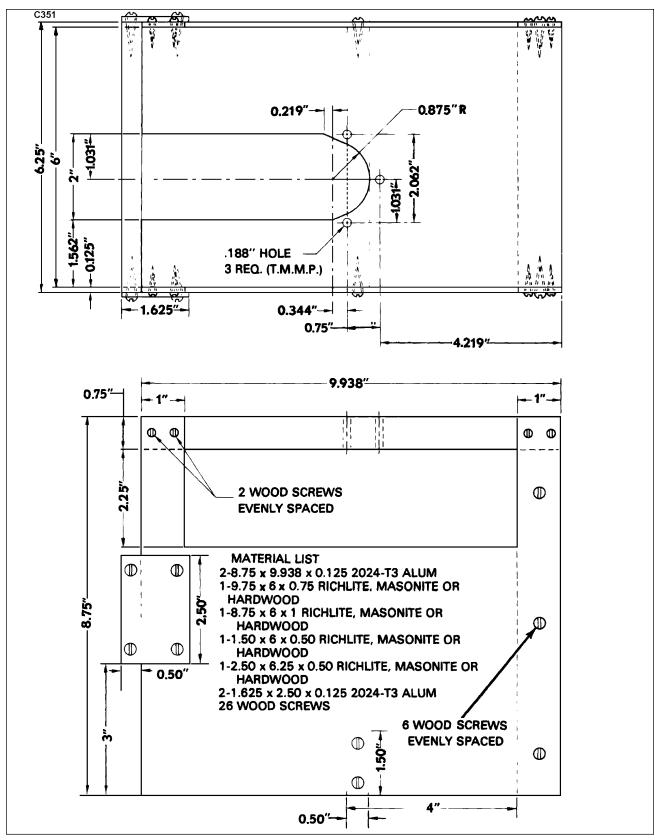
Fuel Quantity Sender Checking Fixture
